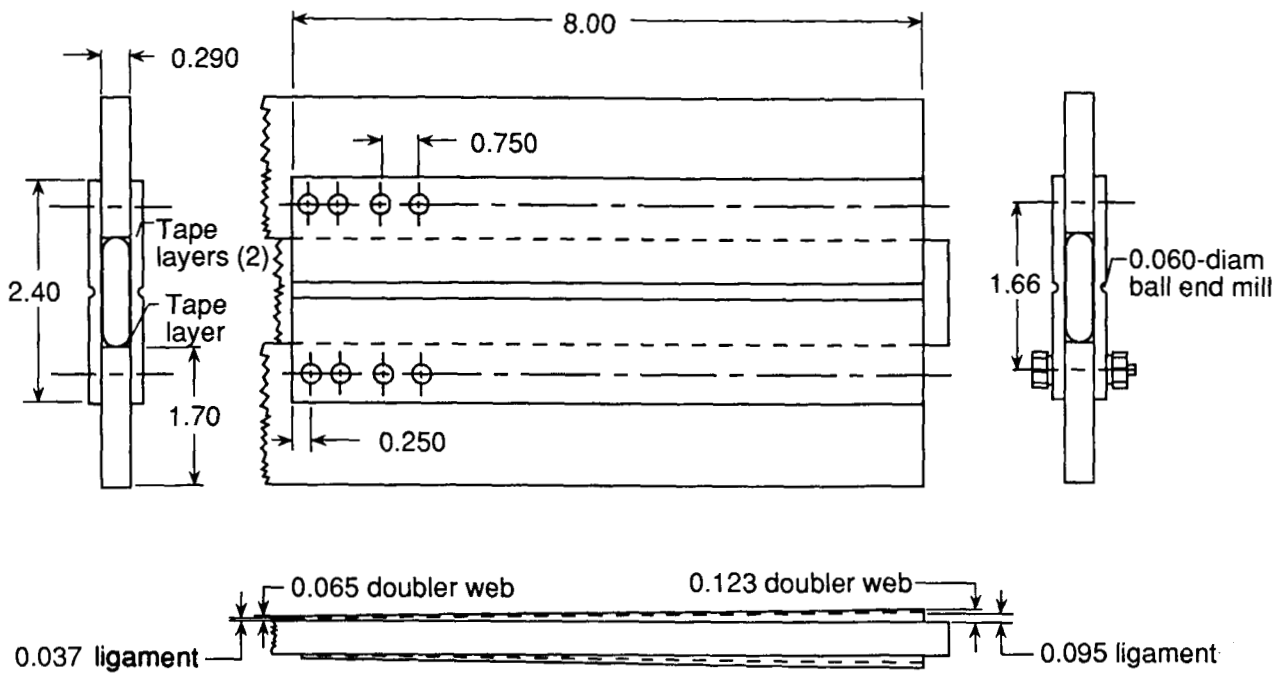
Separation-joint tapered-plate test configuration (lightweight plates). Heavyweight plates were 11 in. long and tapered from 0.183 to 0.065 in. All linear dimensions are in inches.
